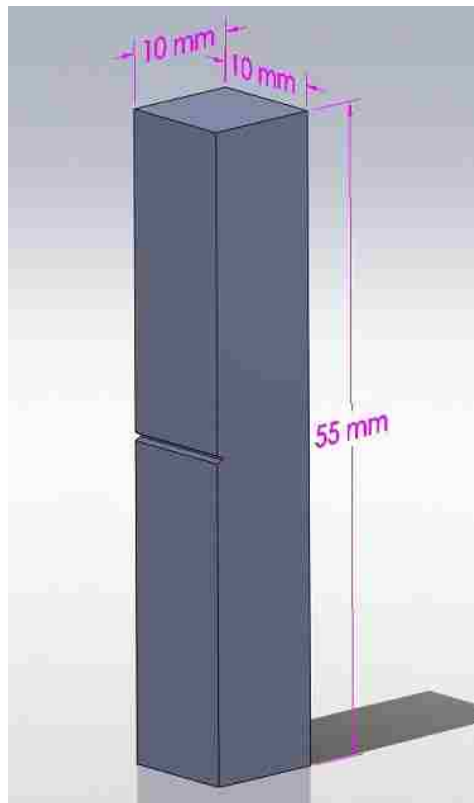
Charpy Test Specimen Dimensions. The major dimensions of the specimens used for Charpy impact testing are shown above.
